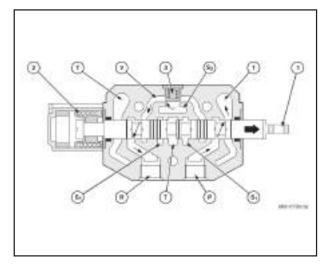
CONTROL VALVE SECTION OIL FLOW - CYLINDER EXTENDING
